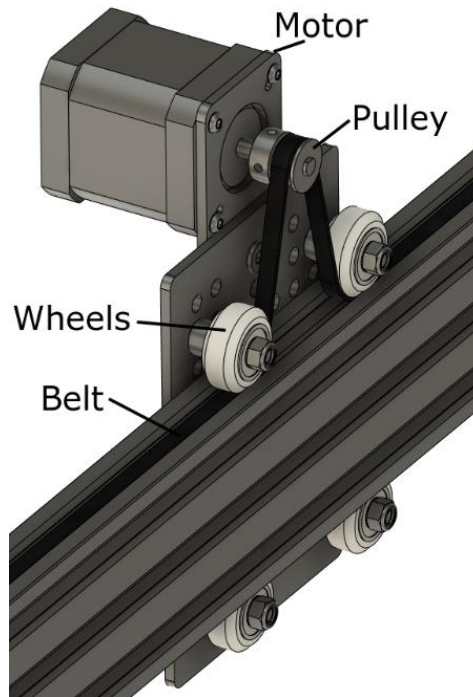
V-slot aluminium profile holding a movable carriage through wheels that stand over the slots.
